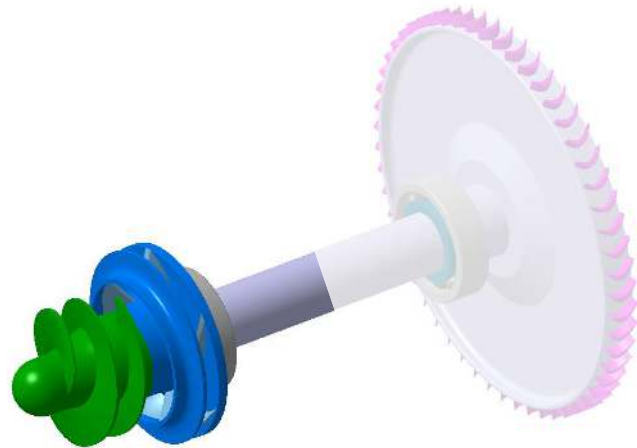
Preliminary CAD view of the developed turbopump at TUM without housing and volute. The pump components are highlighted.
